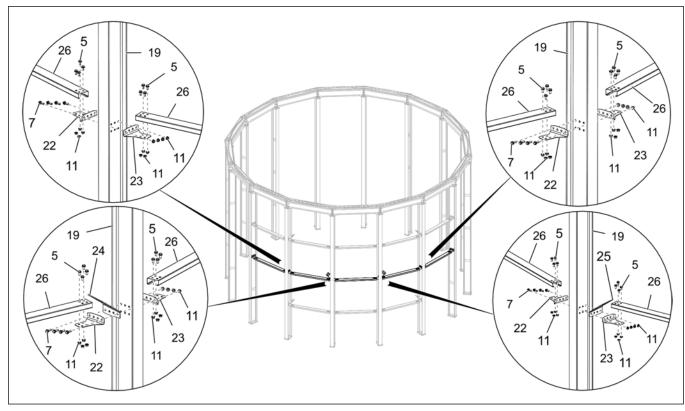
Attaching the top and bottom horizontal bracings to the vertical column (4-leg section)
